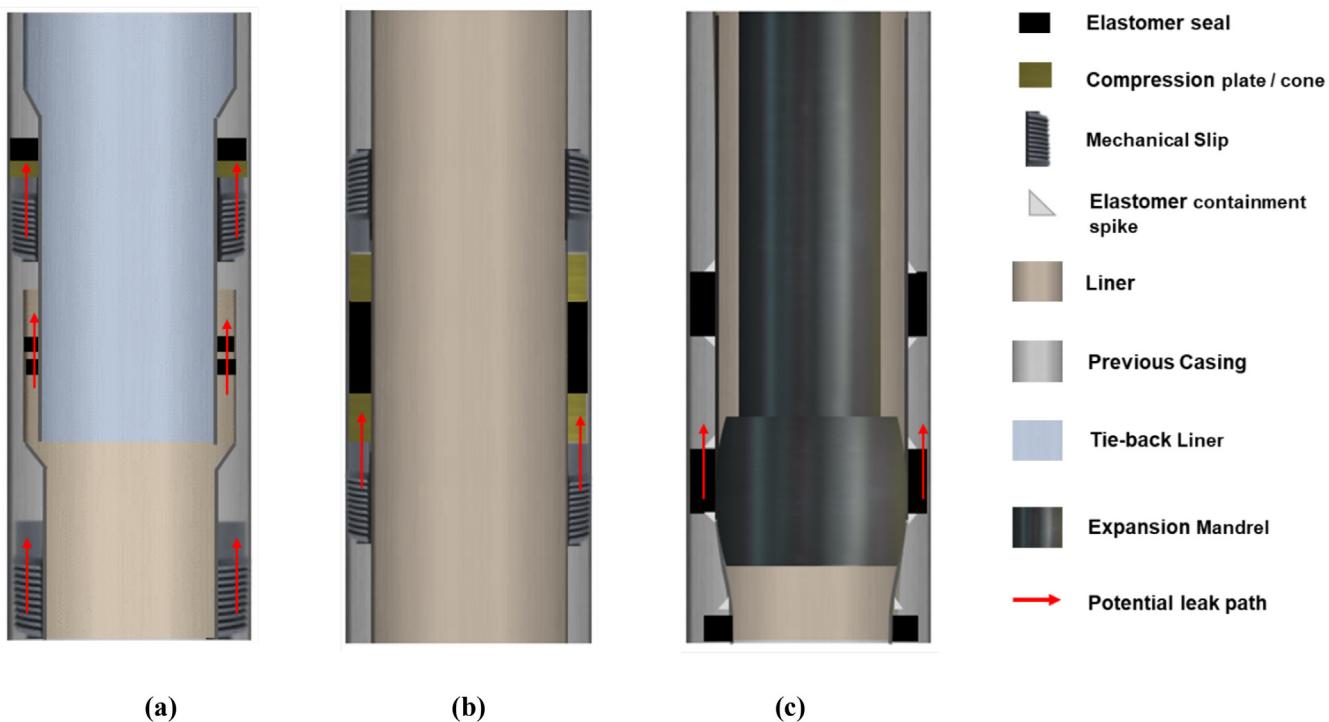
Comparison among (a) liner top packer assembly, (b) integral liner hanger seal, and (c) expandable liner hanger seal assembly.
